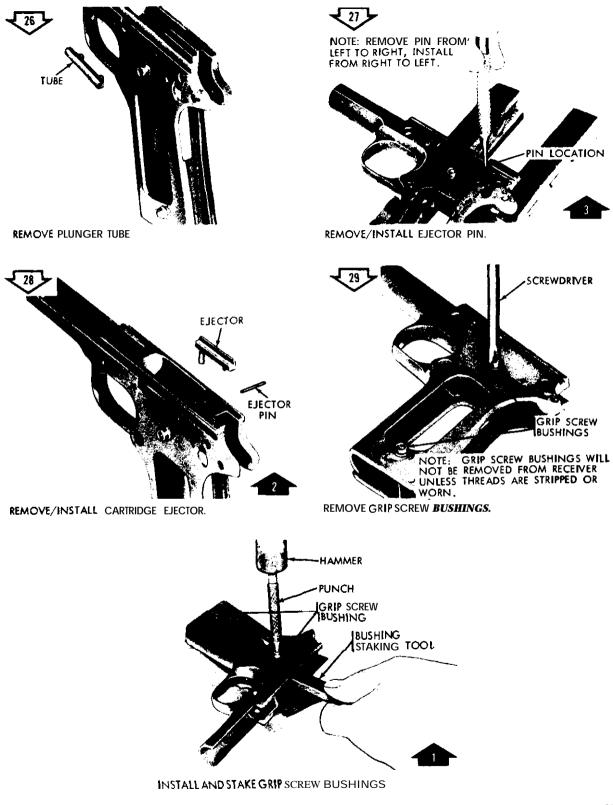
,. Disassembly/assembly of receiver group (6 of 7).
